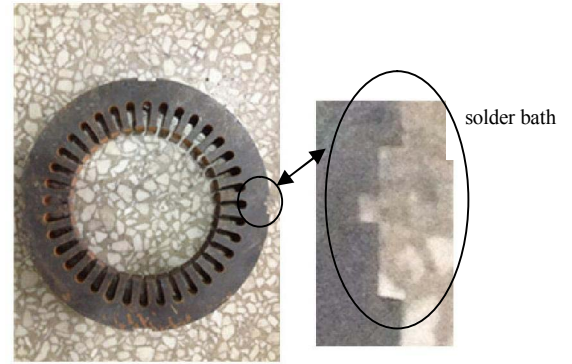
The stator piece solder bath of prototype figure schematic diagram
